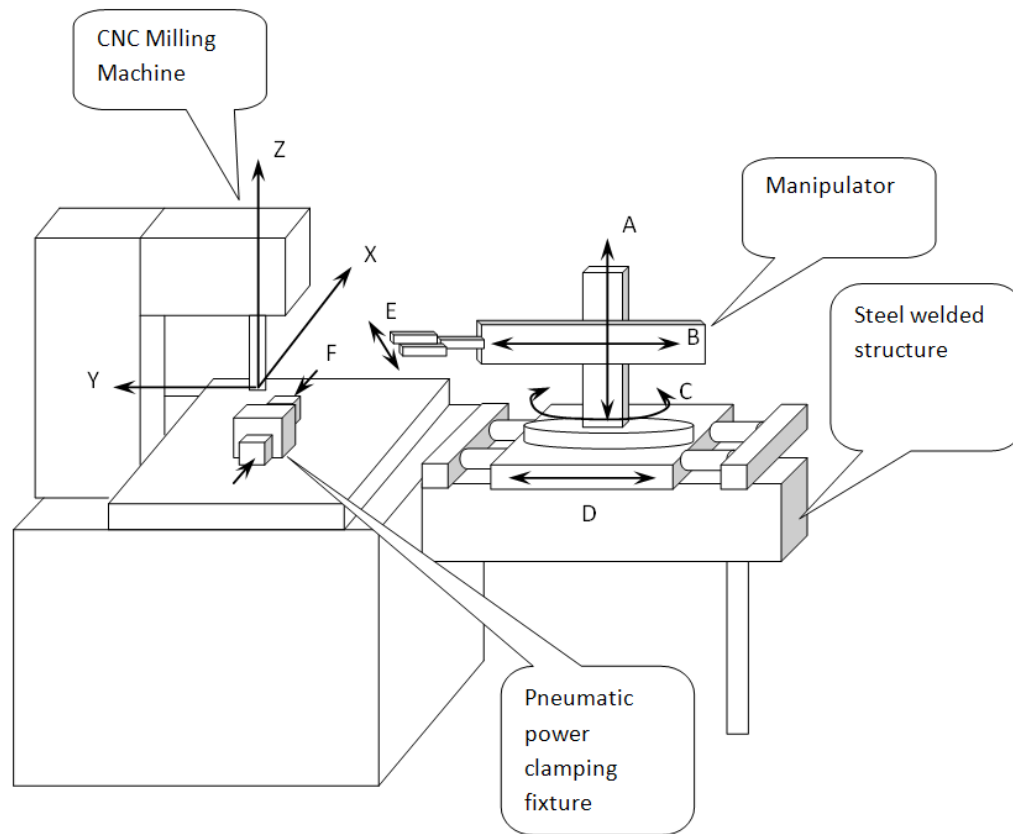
Block diagram for suggested integrated automation system between pneumatic manipulator, CNC milling machine, power clamping fixture and manipulator steel-welded structure
